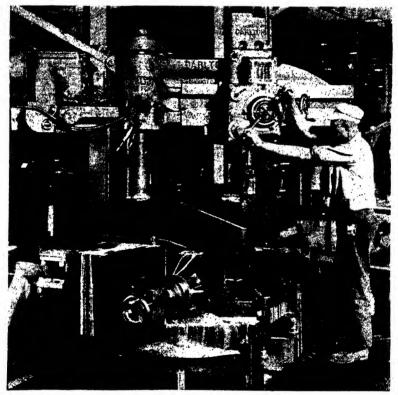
Using a radial drill as a boring machine with a fixture for securing duplicate parts.
